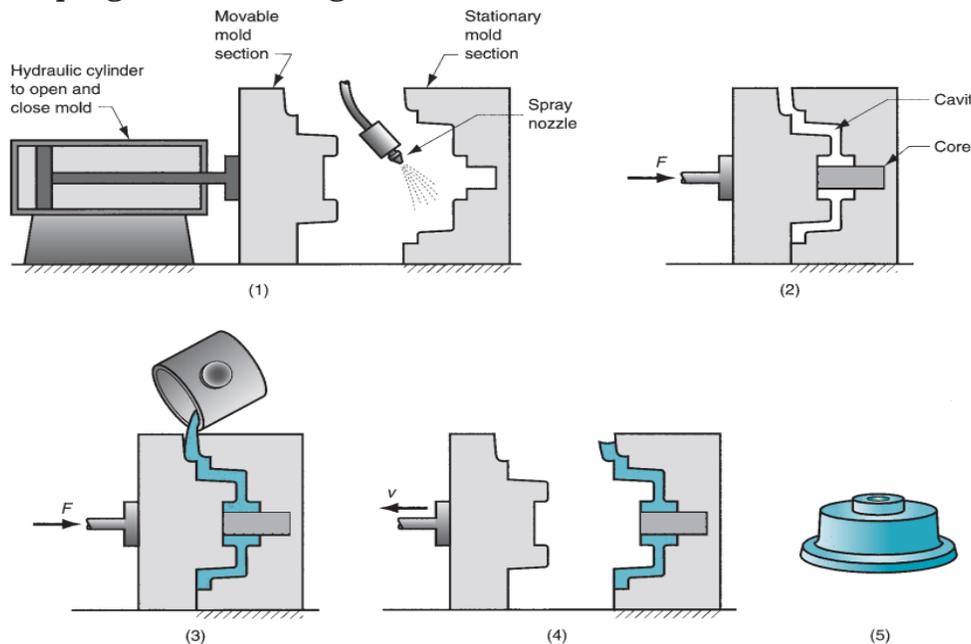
Steps in permanent-mold casting: (1) mold is preheated and coated; (2) cores (if used) are inserted, and mold is closed; (3) molten metal is poured into the mold; and (4) mold is opened. Finished part is shown in (5)
